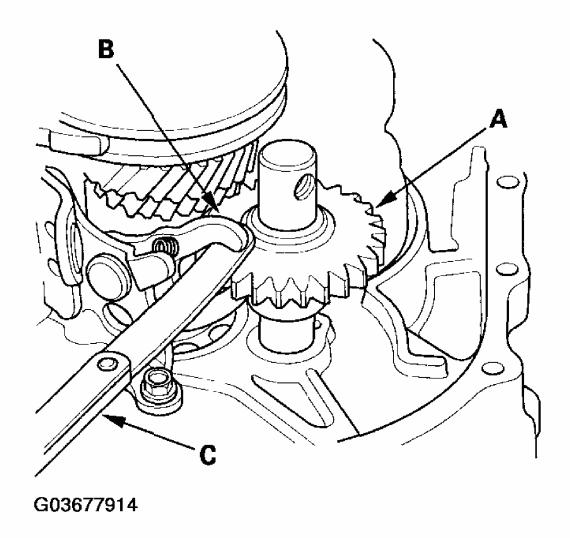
Measuring Clearance Between Reverse Idler Gear And Reverse Shift Fork
